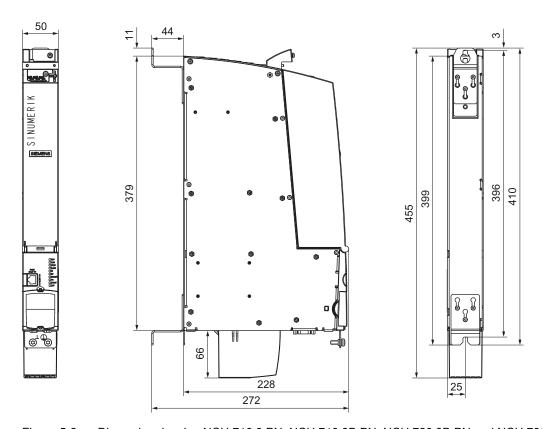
Dimension drawing NCU 710.3 PN, NCU 710.3B PN, NCU 720.3B PN and NCU 730.3B PN; dimensions in mm
